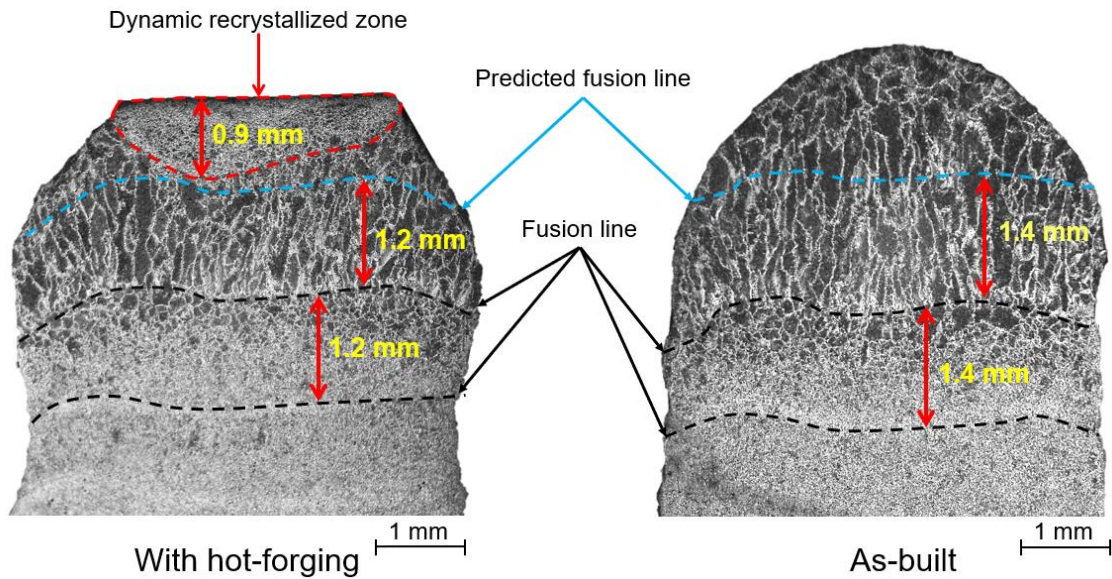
Macrography of the top layers of mild steel samples as-built and with hot forging
